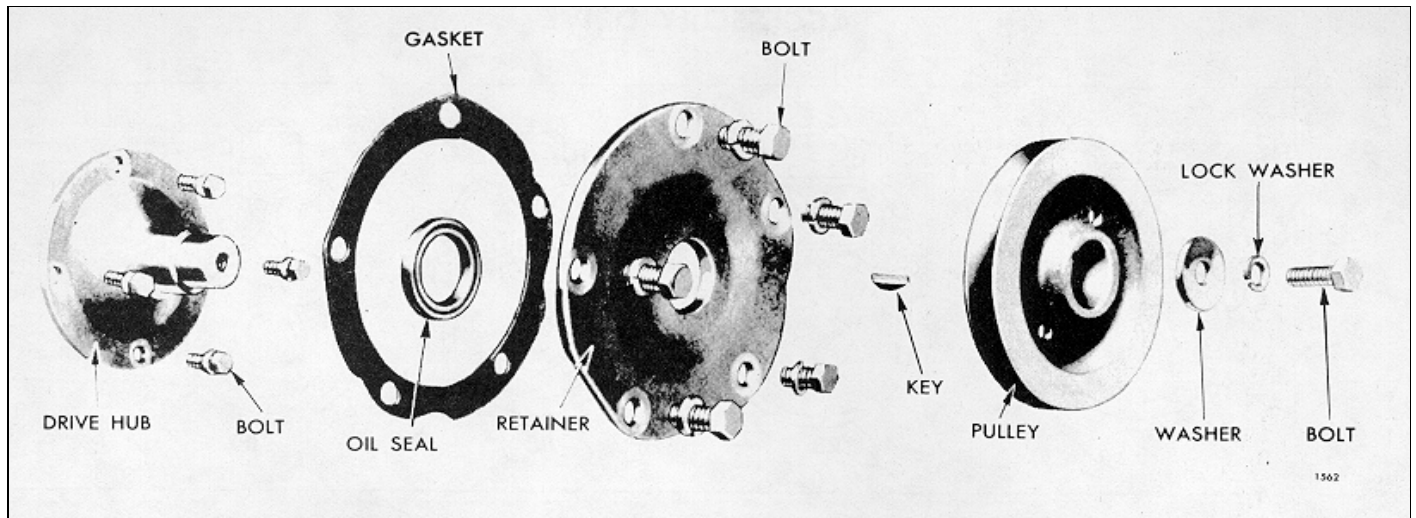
Components of Accessory Drive for Belt Driven Accessory (Drive Hub Type)
